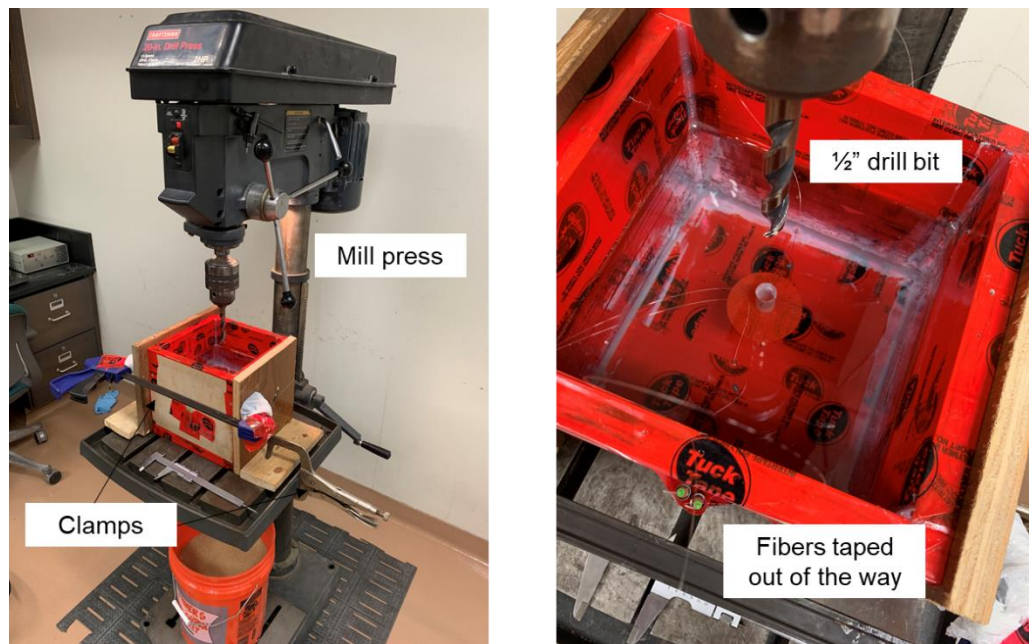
Mill press setup used to the drill the hole for the injection tubing.
